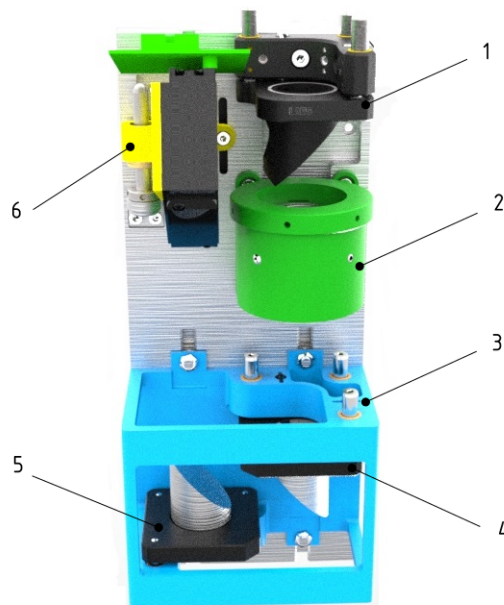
Optomechanical components of the LIBS assembly. 1 - Nd:YAG laserline plane mirror, 2 - focusing optics mount, 3 - collecting optics cage, 4 - primary parabolic mirror mount, 5 - secondary parabolic mirror mount, 6 - spectrometer holder.
